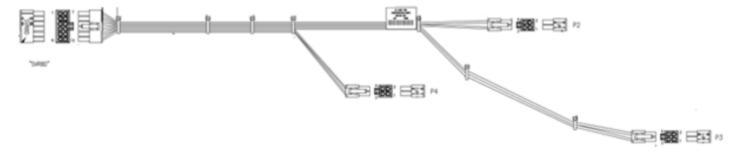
2.5" Drive Module Hot Swap Backplane Power Cable
